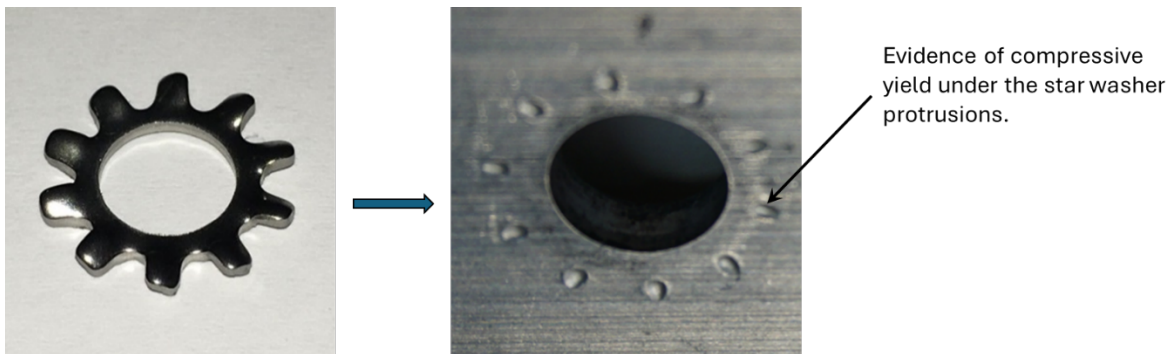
Disassembled Module Through Bolted Joint Bonded with Star Washer
